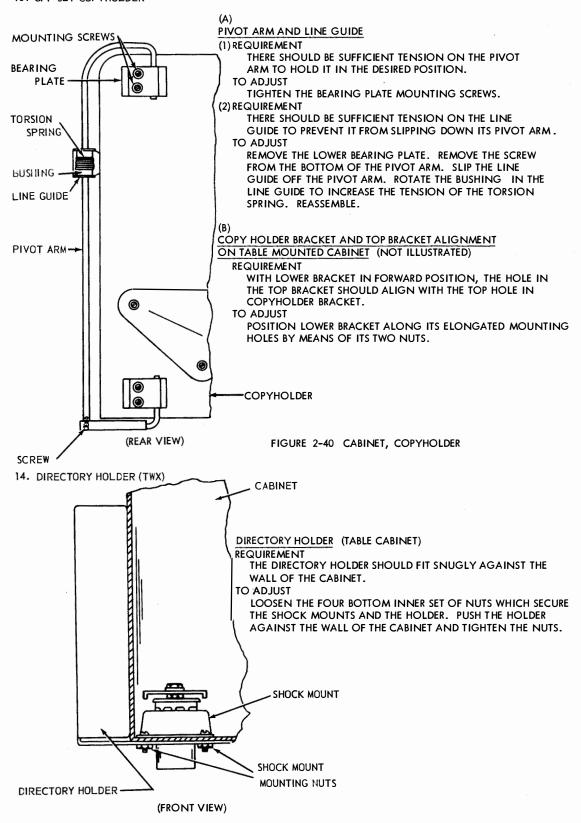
CABINET, DIRECTORY HOLDER
